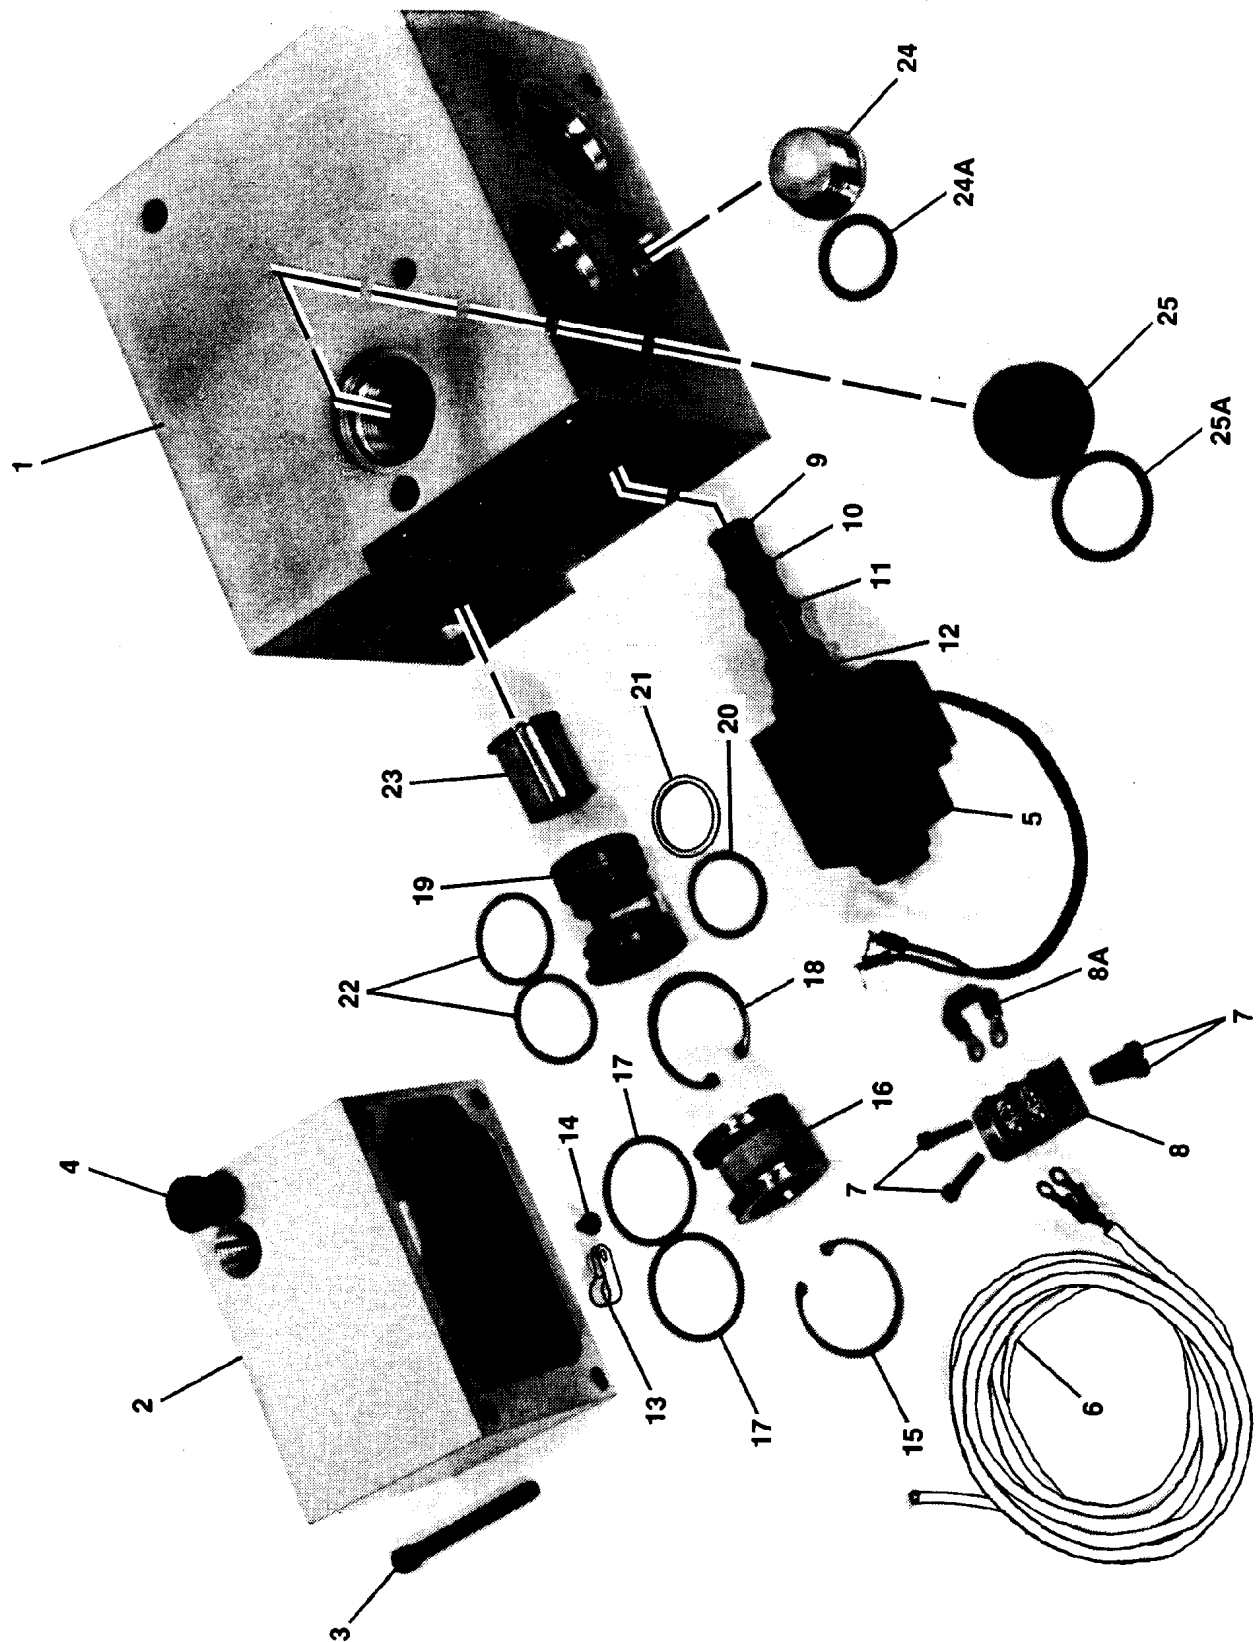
Liquid Fuel Shutoff Valve Exploded View
